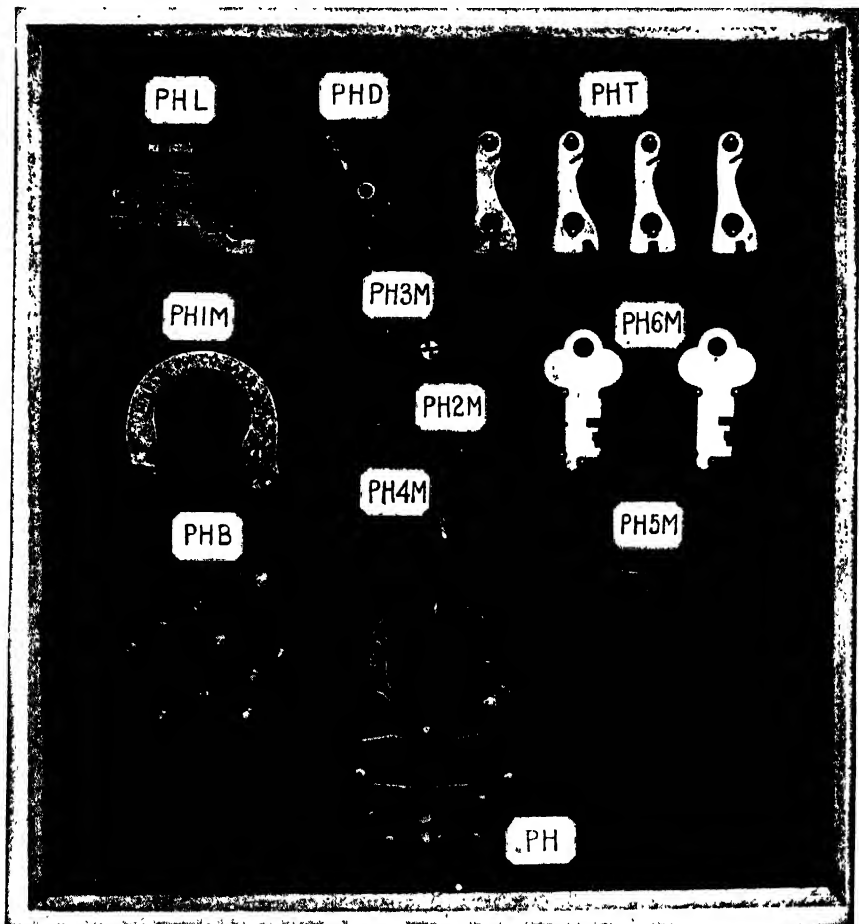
A 2½-in. Heavy Duty Padlock. Finished lock (with front cut open), sub-assemblies and components entering into final assembly. (The symbols used are not those of the Miller Lock Company, manufacturers of the lock, this lock having been selected to illustrate mnemonic nomenclature and routing because of its extreme suitability.)
